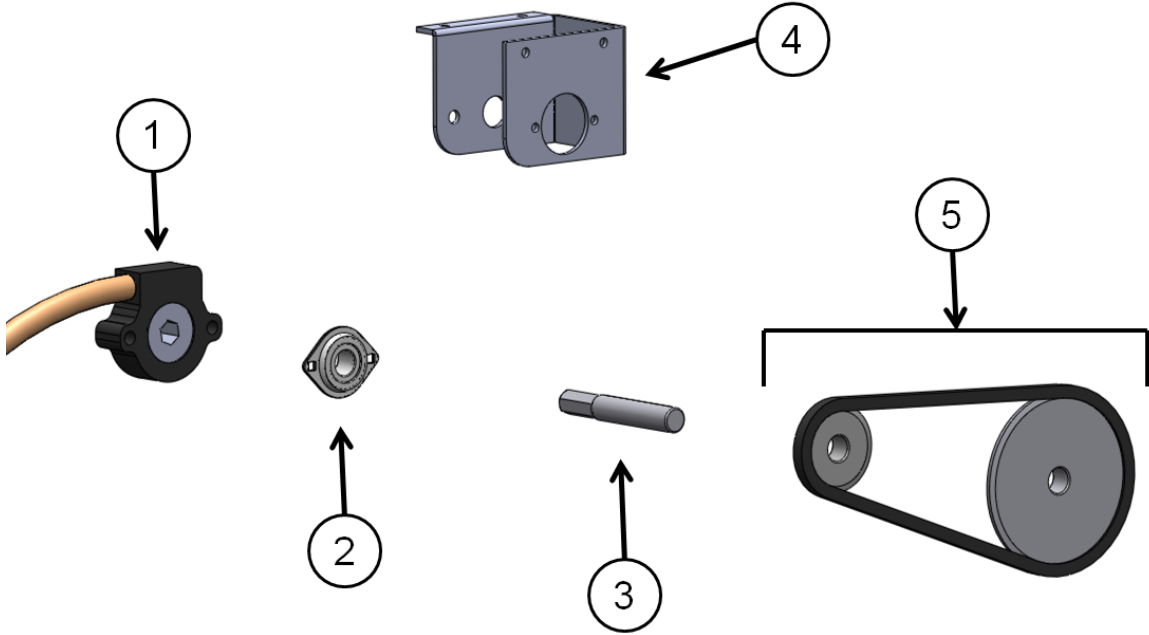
Exploded flex shaft drive design output assembly. Permission pending
